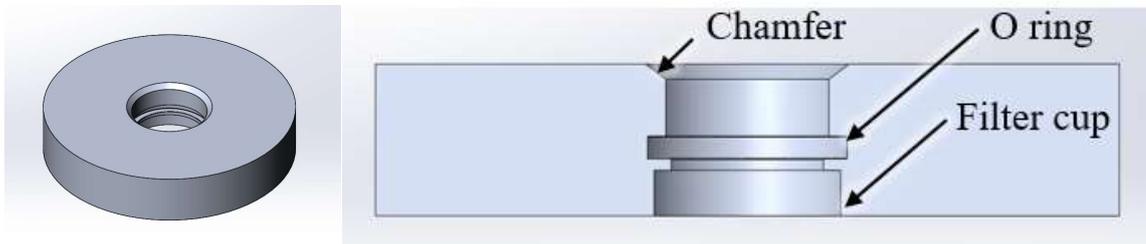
Smallest horn adapter Solidworks® model (left) and its cross-section view (right).
